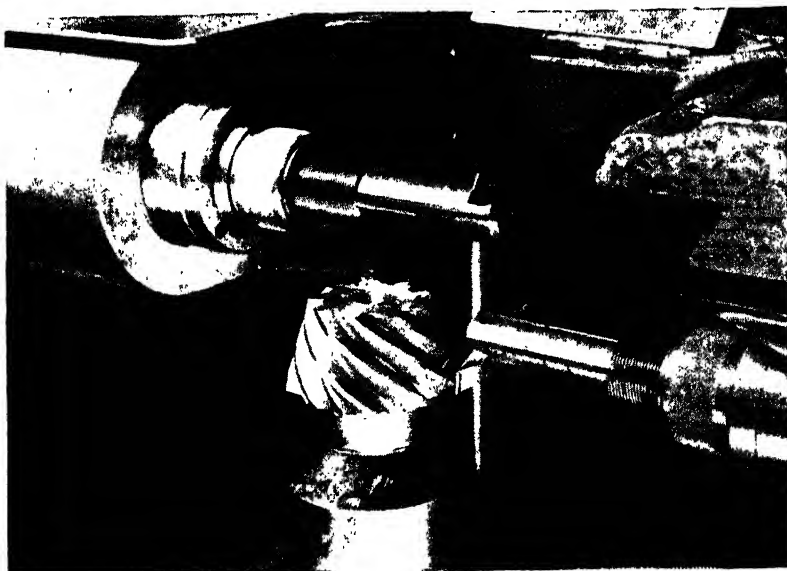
Chamfering Machine for Removing Burrs from Ends of Pinion Teeth
